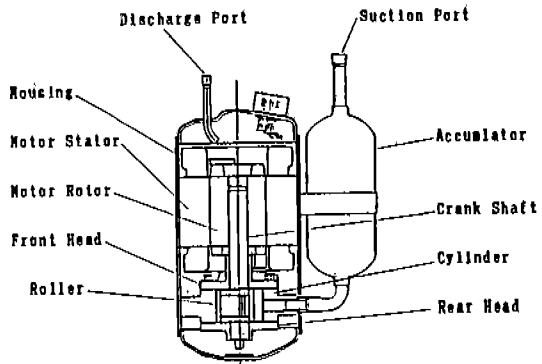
Cross Section of Rolling Piston Type Rotary Compressor
